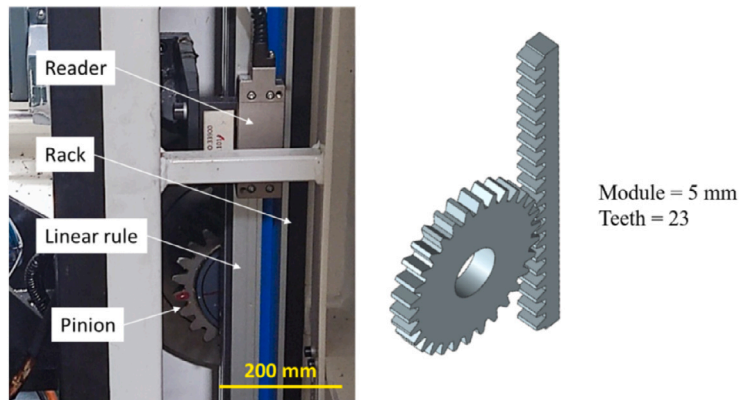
Rack-pinion mechanism, linear rule and reader.
